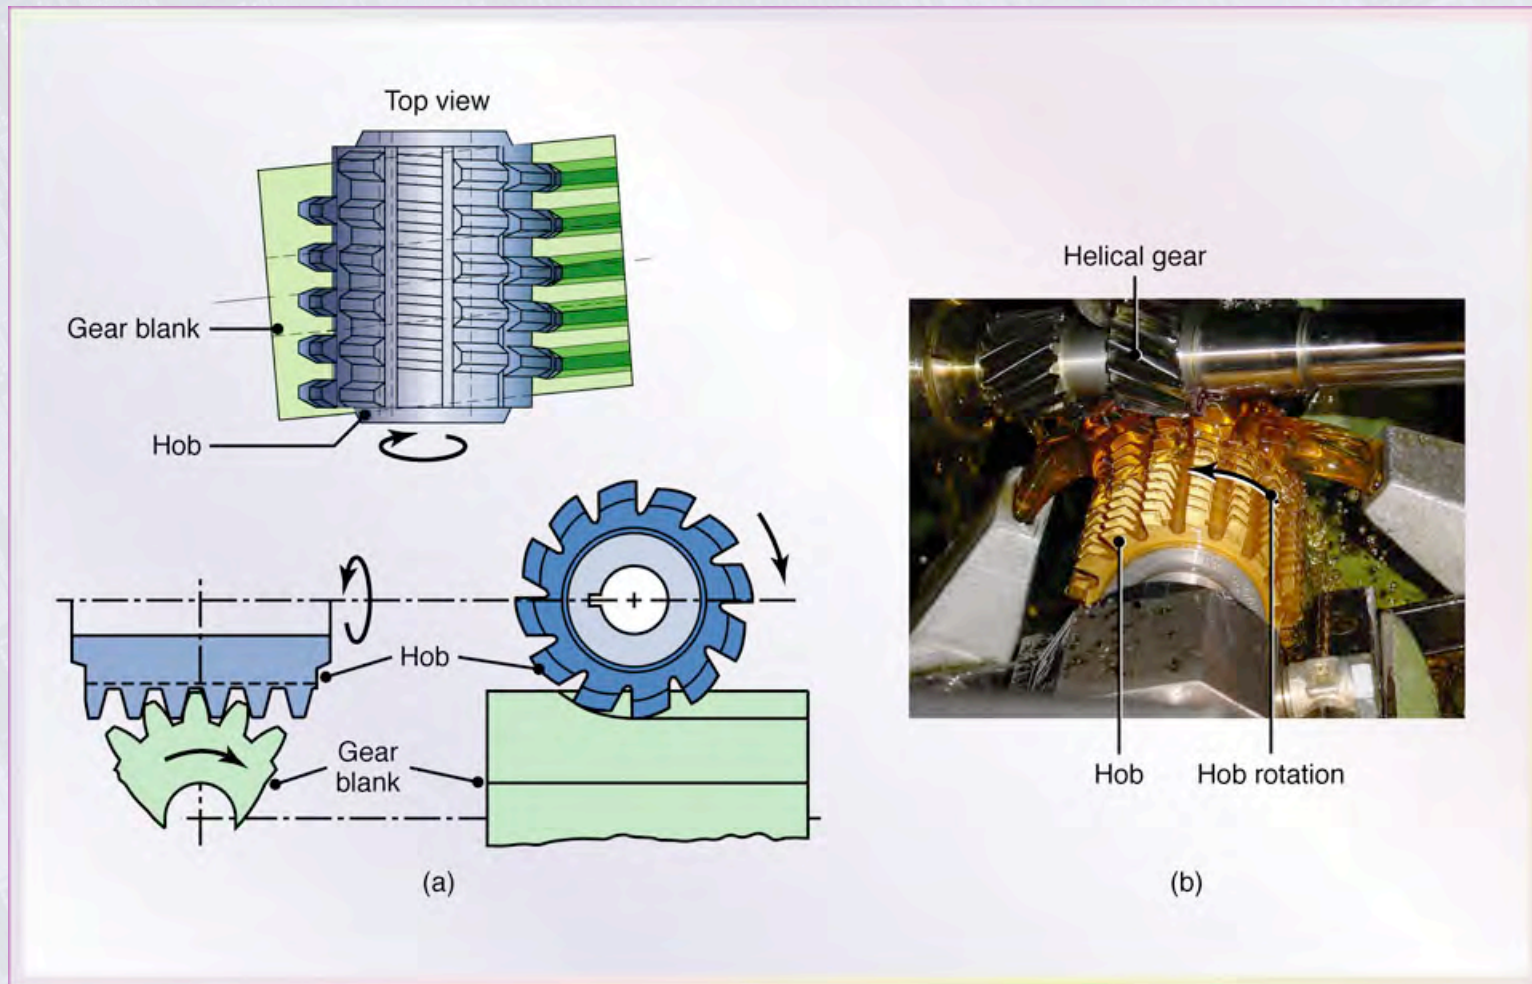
(a) Schematic illustration of gear cutting with a hob. (b) Production of worm gear through hobbing. *Source:* Courtesy of Schafer Gear Works, Inc.
